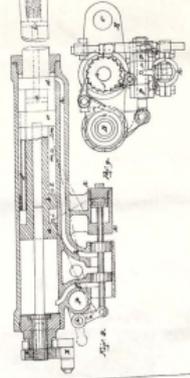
Detail of a mechanical component, possibly a valve or piston part.
